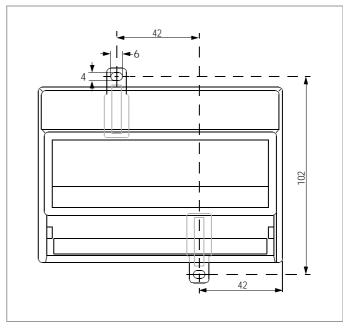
Dimensional Drawing for Wall Mounting (front view)
